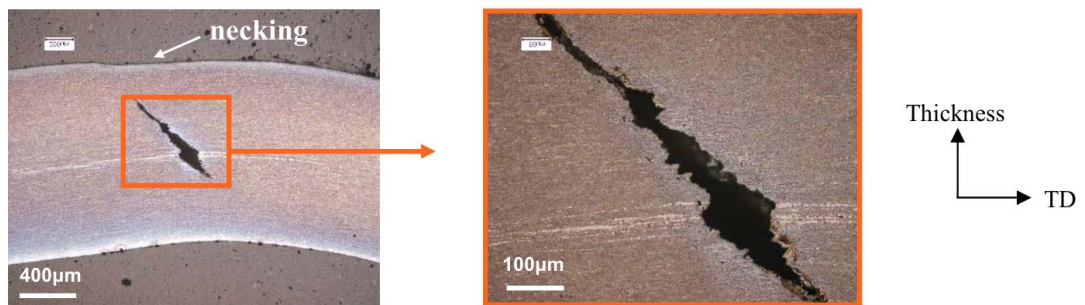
Cross-section of TRIP-aided steel after interrupted stretch bending test ^[2].
